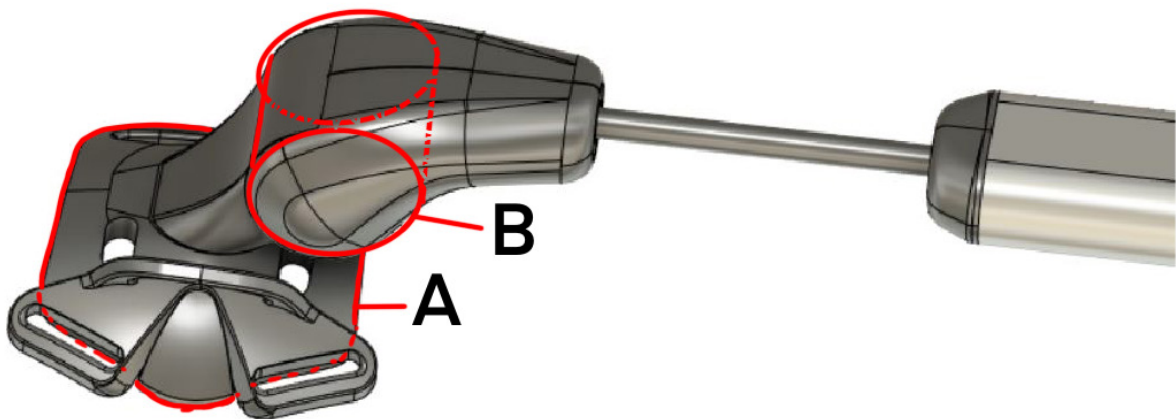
Hand-extension element joint of STIL's current orthosis (A= Hand piece, B = WFE damper housing)
